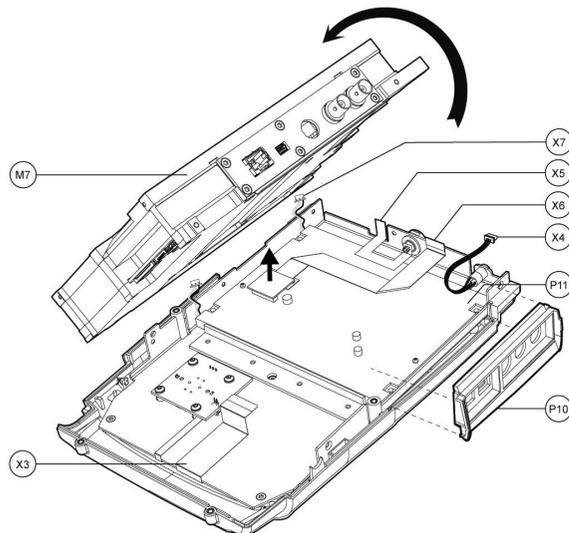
Remove INTERNAL MODULE and SIDE PART RIGHT
